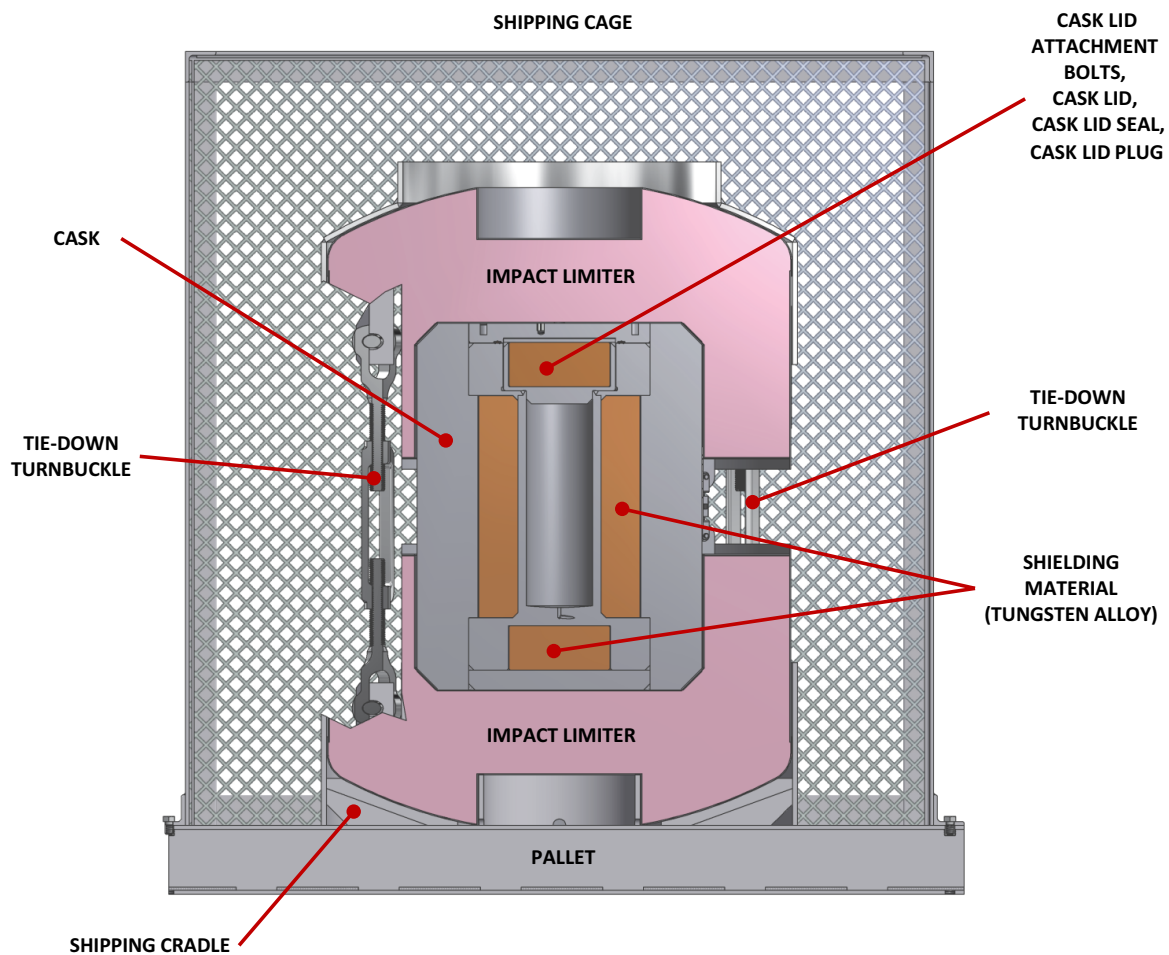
Assembled Transport Package Cutaway – Model AOS-050A
